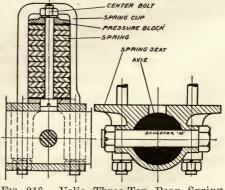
Velie Three-Ton Rear Spring Mounting.
